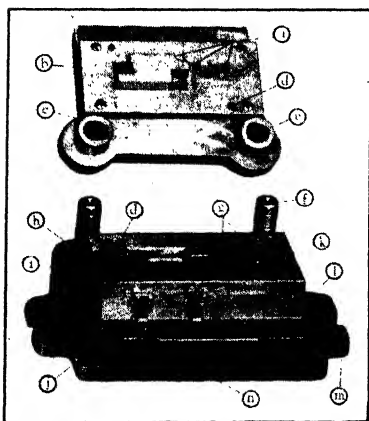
A follow type perforating die with parts labeled: (a) punches, (b) punch holder, (c) punch plate (standardized), (d) dowels, (e) guide pin bushings (standardized), (f) guide pins (standardized), (g) punch guide bushings, (h) fixed stock guide, (i) feeding space, (j) spring guides, (k) stripper plate (fixed), (l) die, (m) die base (standardized), (n) number and name plate.
